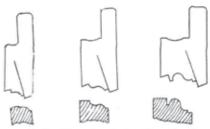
Sash Fig. 72.—Sash Fig. 73.—Ogee Plane. Plane. Moulding Plane.
